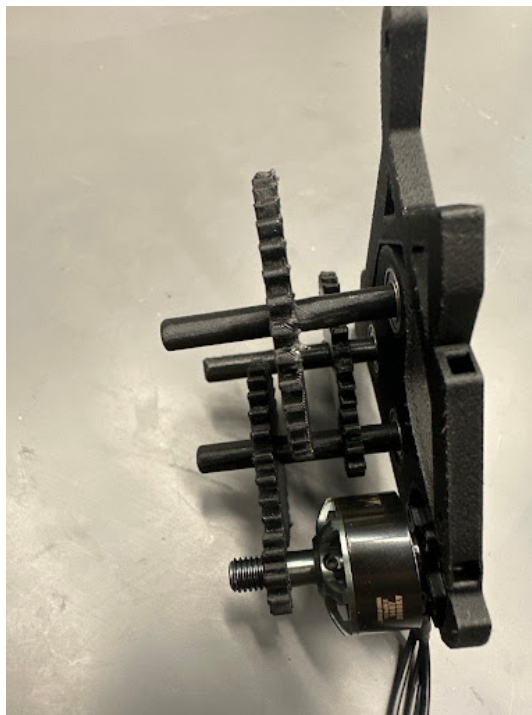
Then place the third shaft into the third bearing, 30T gear side first. You may need to unalign the first two axles to get it in place. Now make sure all of the axles line up and are meshed as above.
